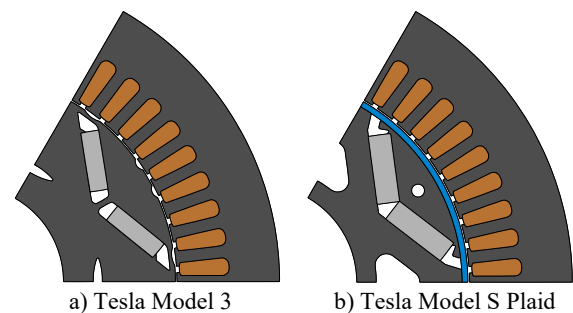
Examples of a conventional IPM motor a) and a WIPM motor b) with a only a single machine pole depicted.
